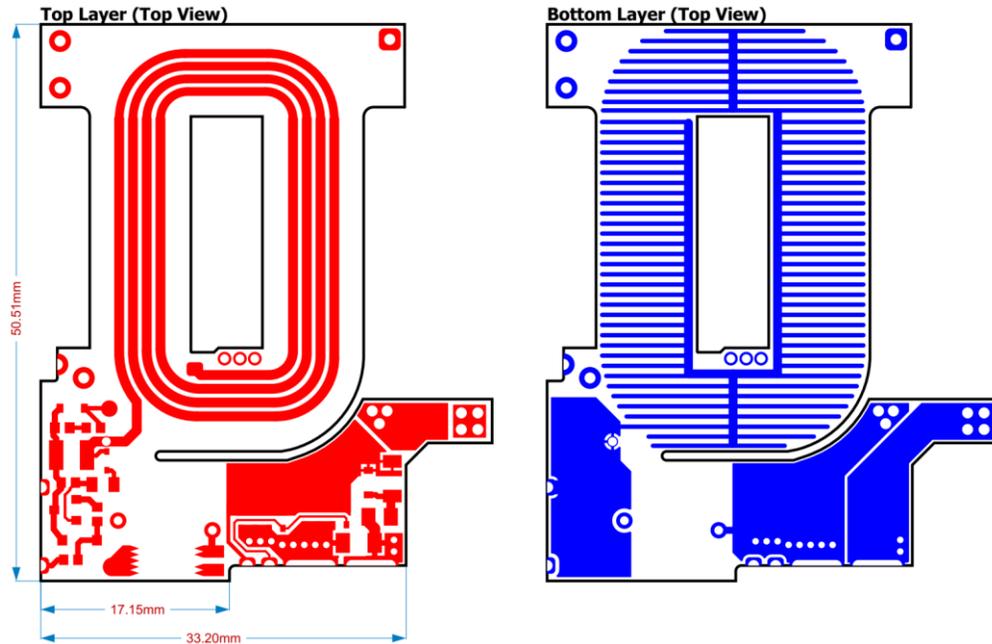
SR FET, Bias Supply, and Primary-Side Winding PCB, Top and Bottom Layers.
